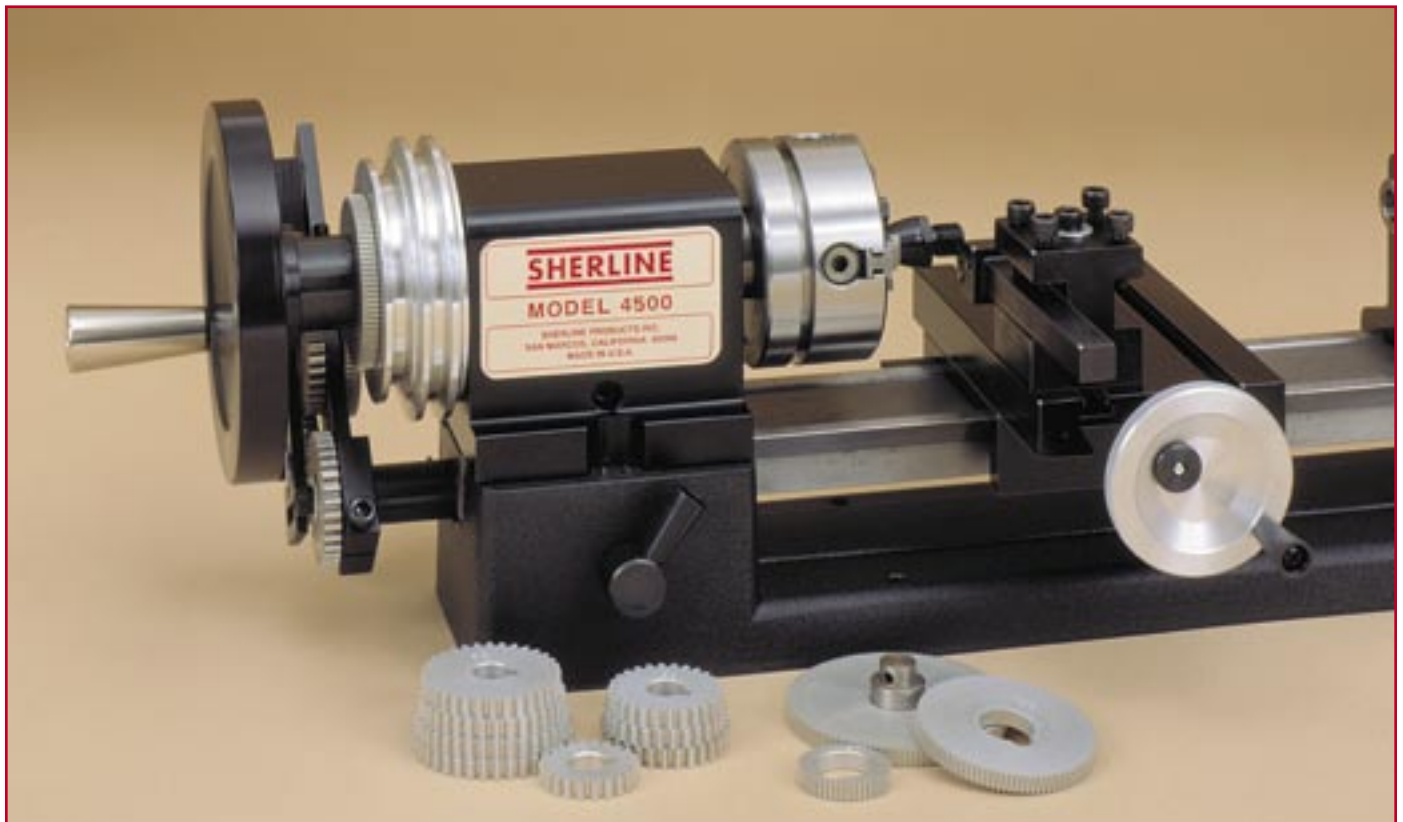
When the lathe is set up with the thread cutting attachment, the motor is removed and the spindle is turned by a large handwheel. A thread is being cut in a part held in a 4-jaw chuck. In the foreground are some of the change gears used for cutting different size threads.
